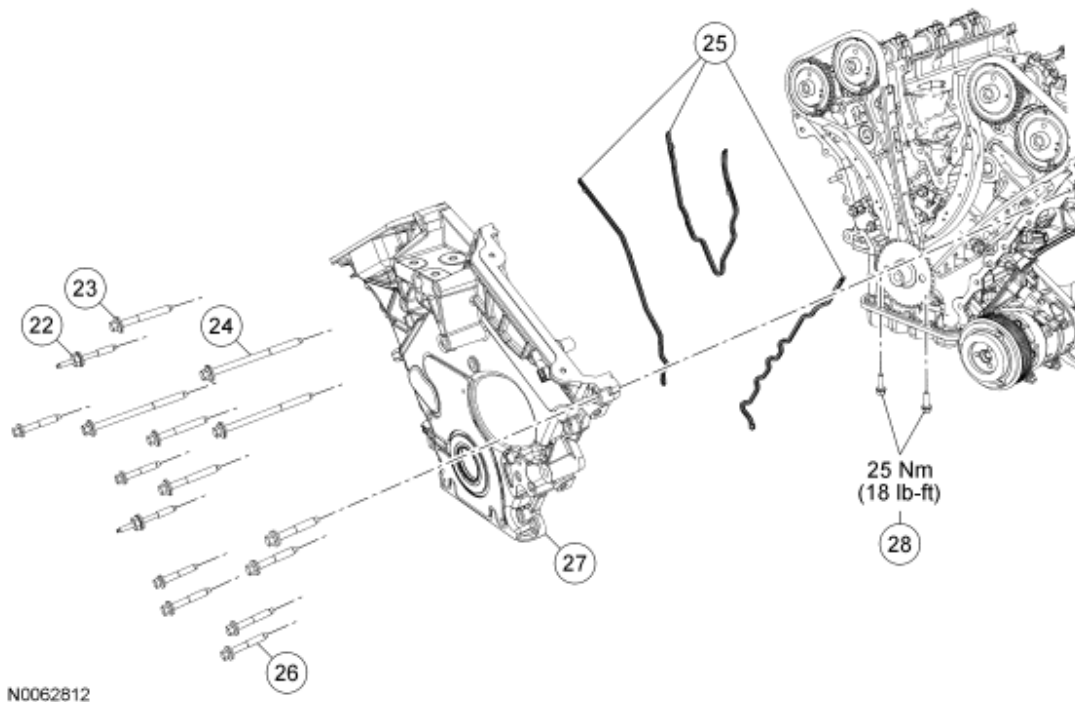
Engine Front Cover Components With Torque Specification (4 Of 4)
